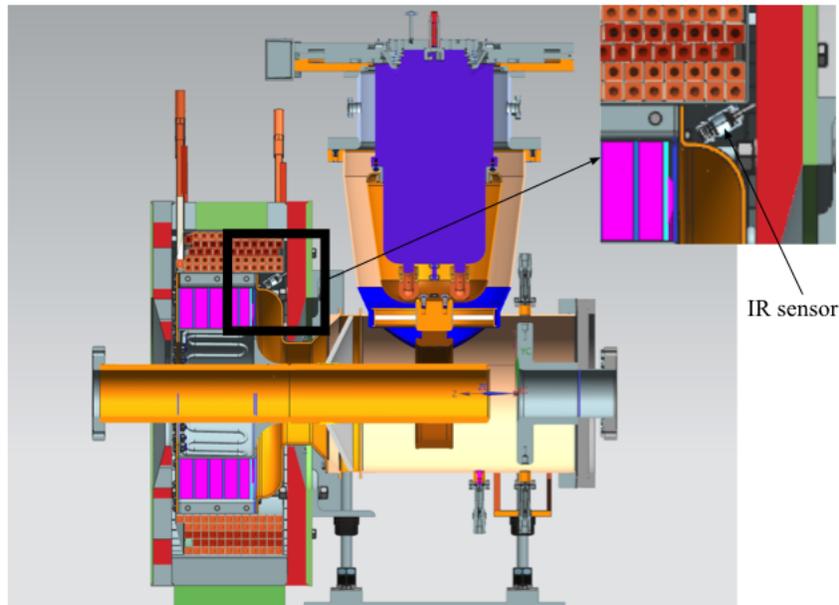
The IR sensor is mounted between the tuner and the solenoid. It peers at the front face of the tuner through a hole drilled through the tuner shell.
